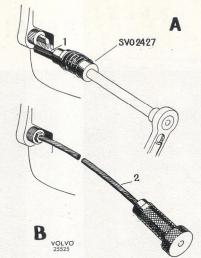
Removing the gearbox bolts, vehicles with B 16 engine
